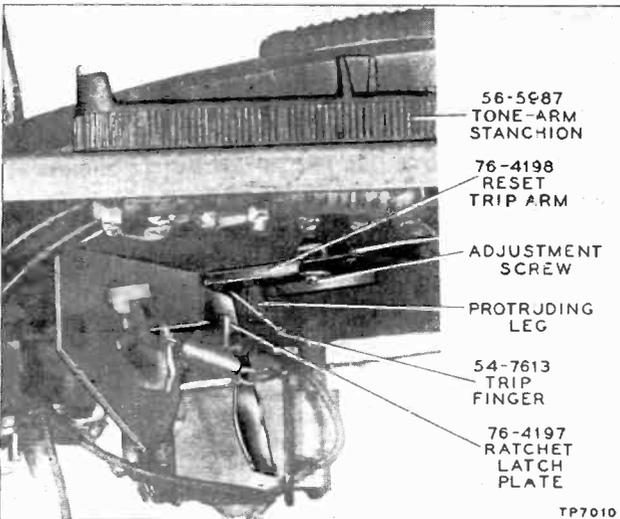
Trip Assembly, Showing Trip Finger Riding Over Ratchet Plate
